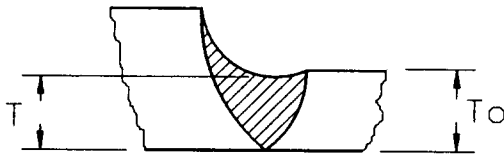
Schematic diagram of weld bead in different thickness welding
